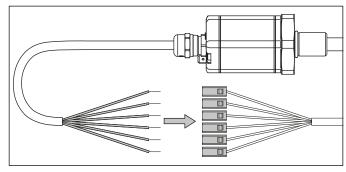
Connection of adapter cable to R-Series V sensor with cable output
